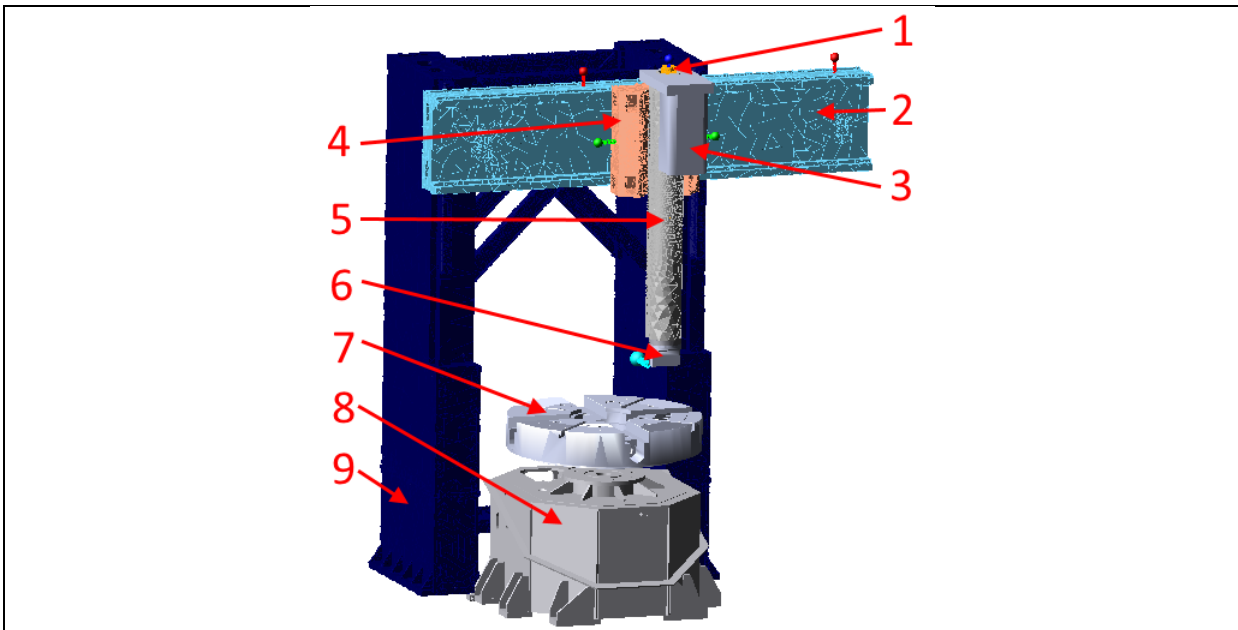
Machine tool MBS model with schematic connection of DVAs/DVNs; parts of the model are as follows: 1 – spindle, 2 – crossbeam, 3 – drive of the spindle, 4 – support, 5 – slipper, 6 – tool holder, 7 – clamping plate, 8 – bed, 9 – stand
